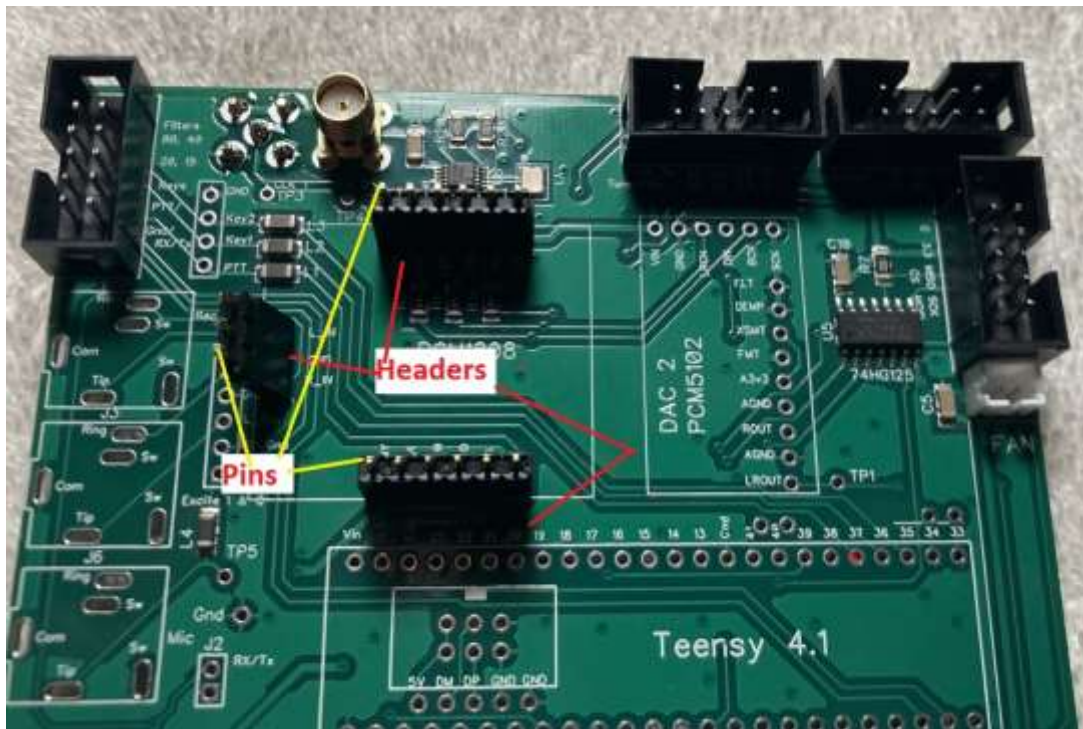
Dry fitting the combined headers and pins on the PCB.
